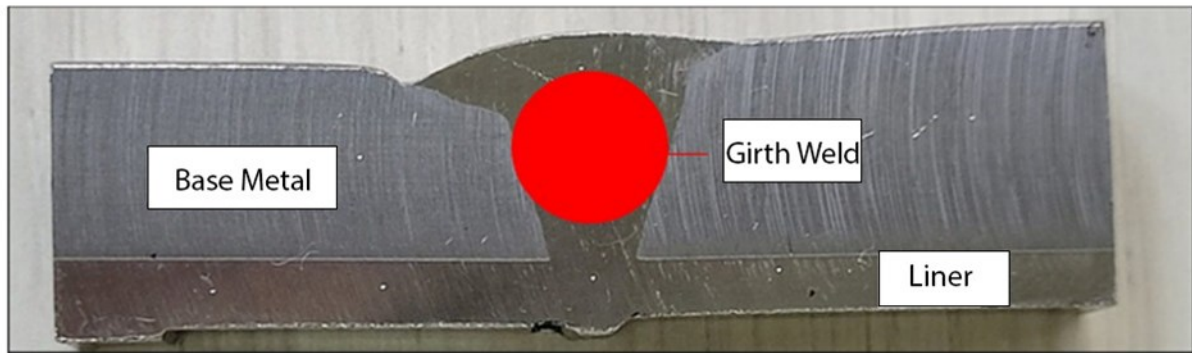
Weld region where the sample extractions were performed for the tensile test specimens.
